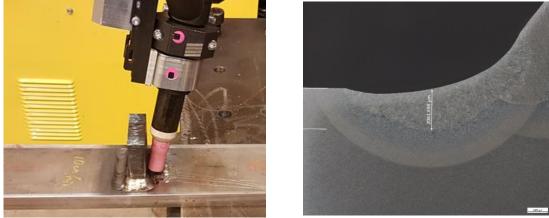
Left: TIG-torch direction for fatigue crack repair. Right: TIG-reweld transition region.
